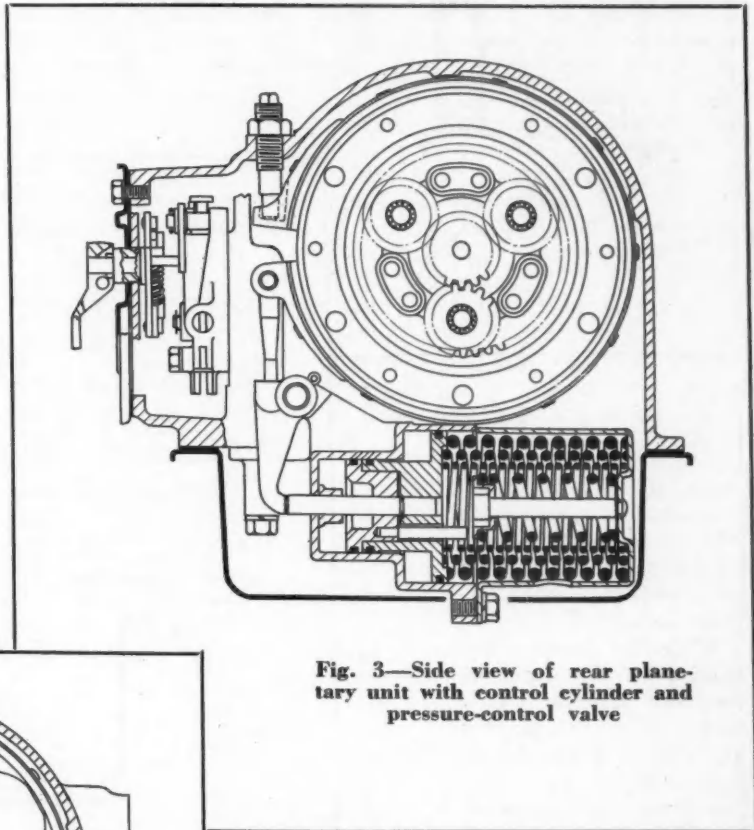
Side view of rear planetary unit with control cylinder and pressure-control valve
